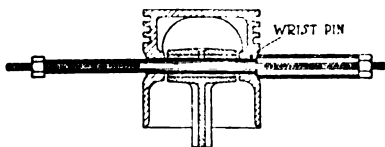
For removing piston pin or bushings, a rod is turned to slide freely through bushing and then threaded S. A. E. standard. The pulling bushing is made slightly smaller than hole in piston, see also, page 649.
